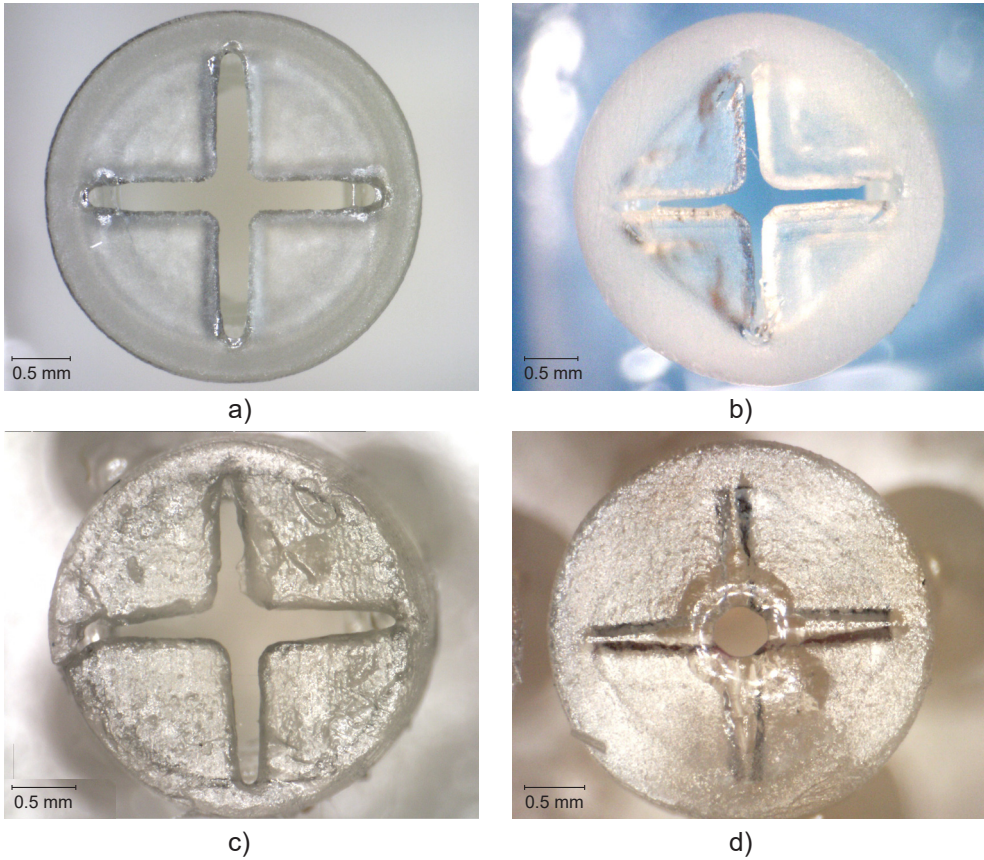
Top surfaces of the 3D printed valves with the smallest top-and slit dimensions for different materials. a) Valve printed in Dental SG. b) Valve printed in Durable. c) Valve printed in Elastic 50A. d) Valve printed in Flexible 80A, with only an opening in the centre of the valve.
